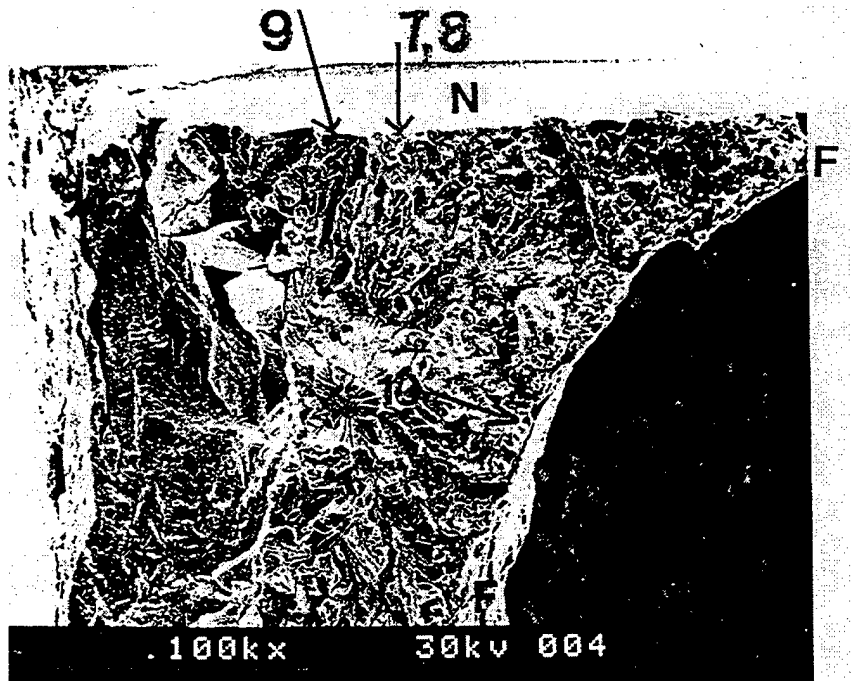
Transverse fracture surface near the laboratory-induced notch (100X).
